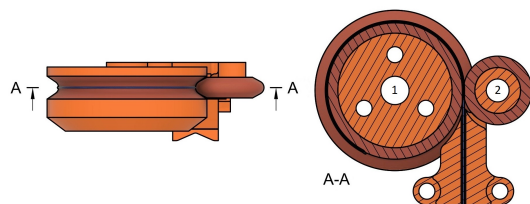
Cable drive mechanism top view and section. Drive wheel (1), idler (2) and cable in blue in the section view.
